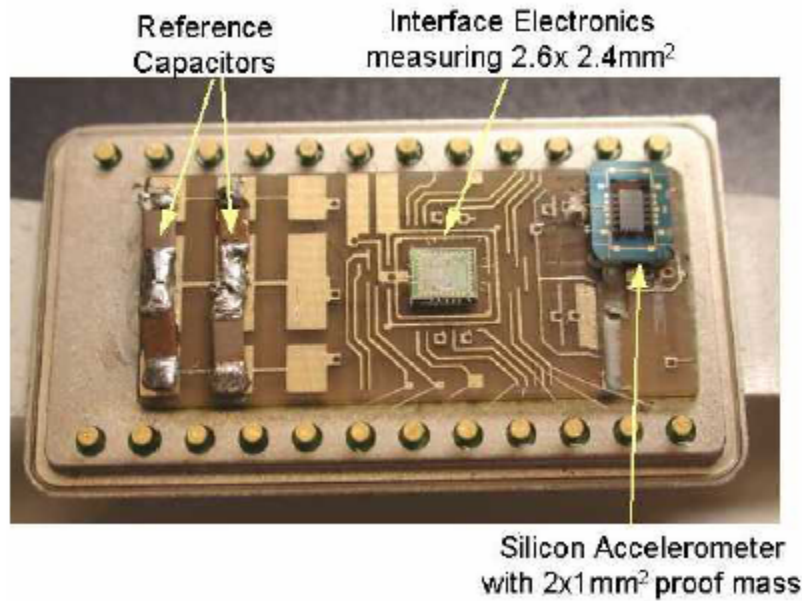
Hybrid packaged *Out-of-plane* accelerometer and the interface chip in a 24-pin IC package.
